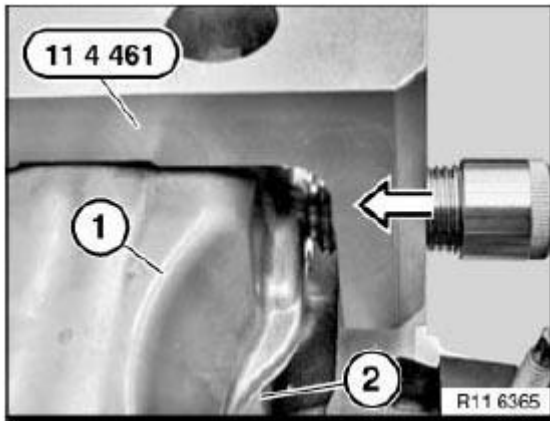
Tightening Special Tool (11 4 461) Screw On Upper And Lower Bearing Bank Ground Surfaces
